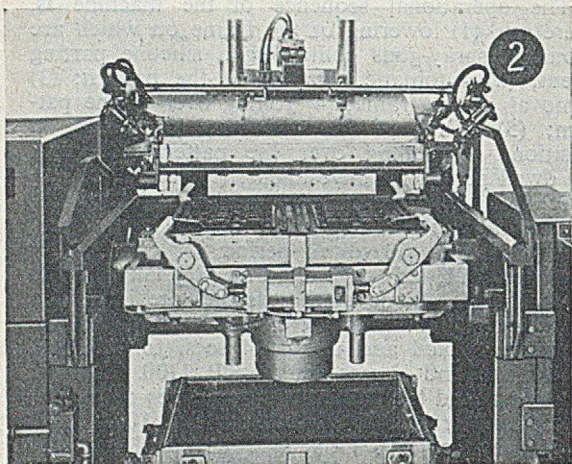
F.E. (Sutter) Shell-moulding Machine.
